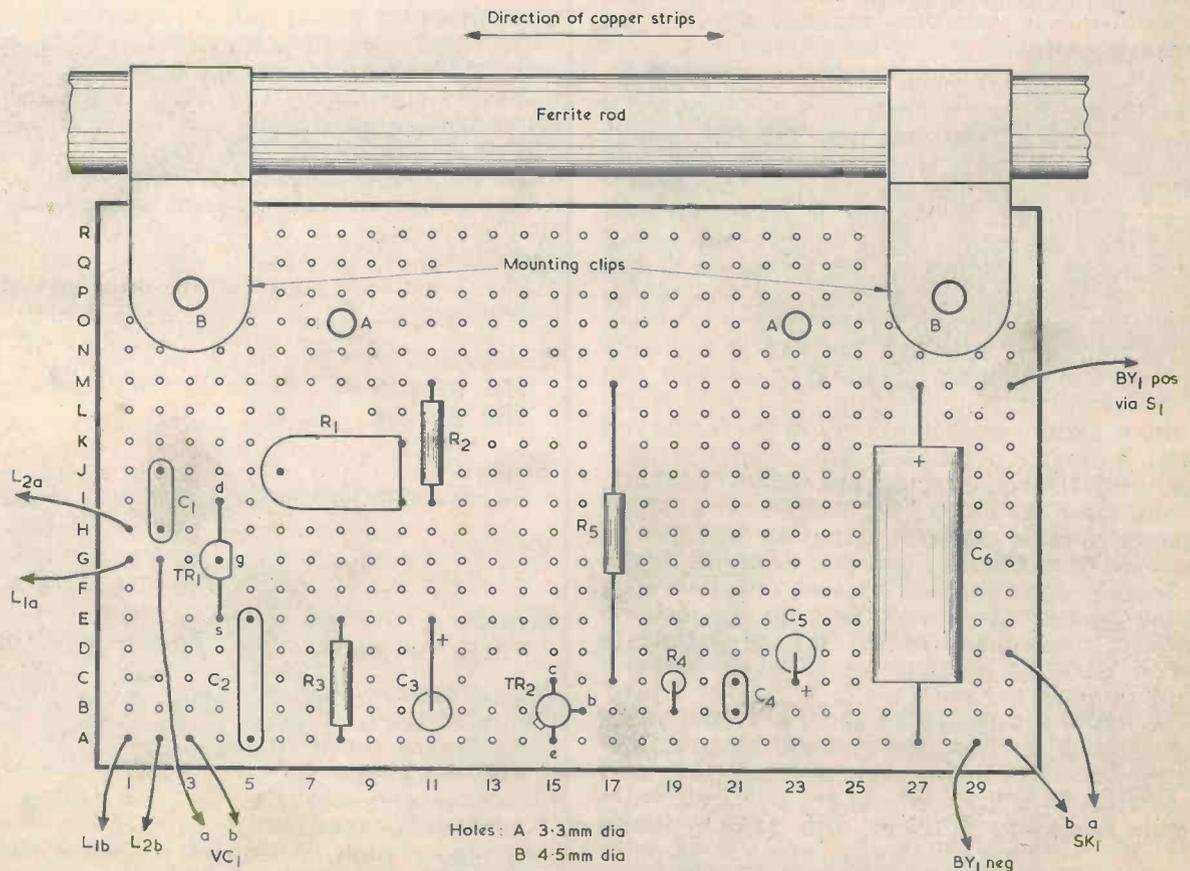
How the components are assembled on the Veroboard panel. There are no breaks in the copper strips.
